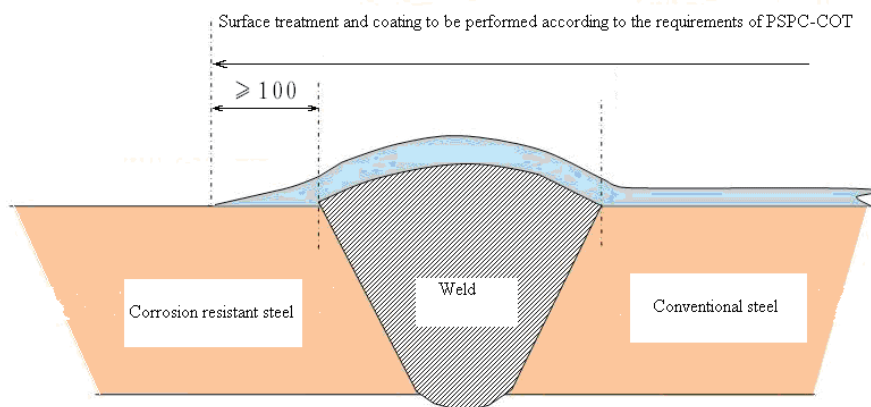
(1) Welding of corrosion resistant steel to conventional steel
